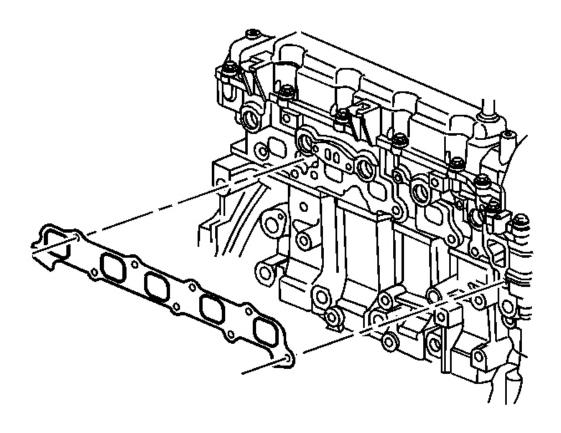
View Of Exhaust Manifold Gasket Courtesy of GENERAL MOTORS CORP.
